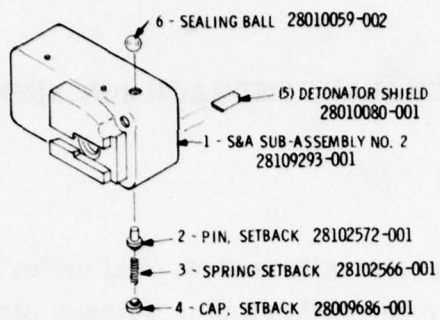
Machine ;No. 4 - S&A Mechanism Setback Pin Assembly
